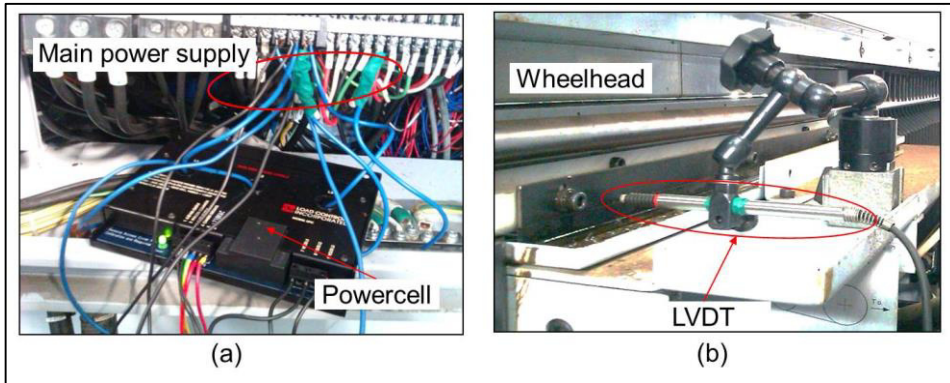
Mounting location of sensors in grinding machine tool (a) Powercell (b) LVDT
